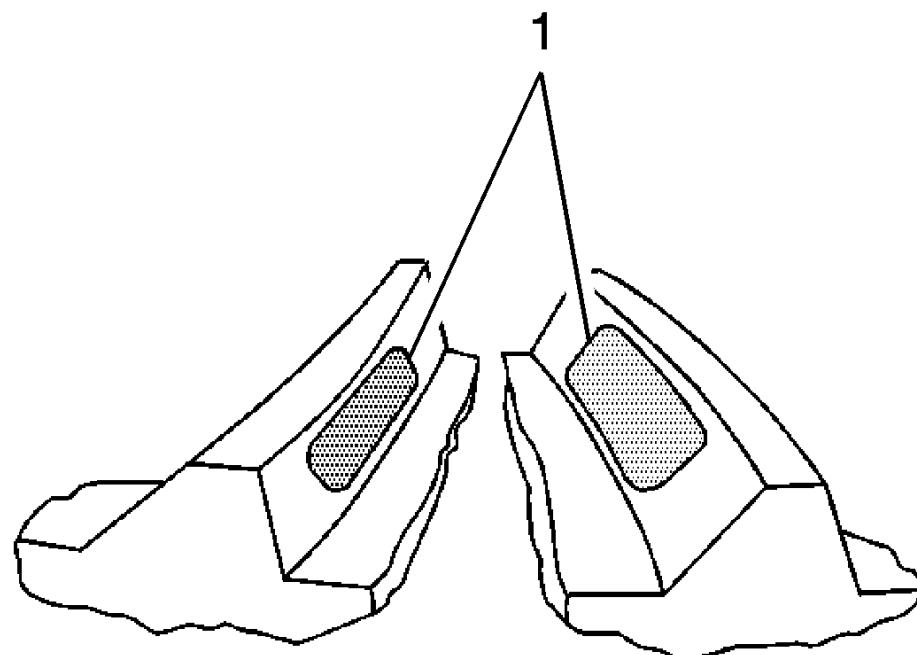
Identifying Correct Gear Tooth Contact Pattern
